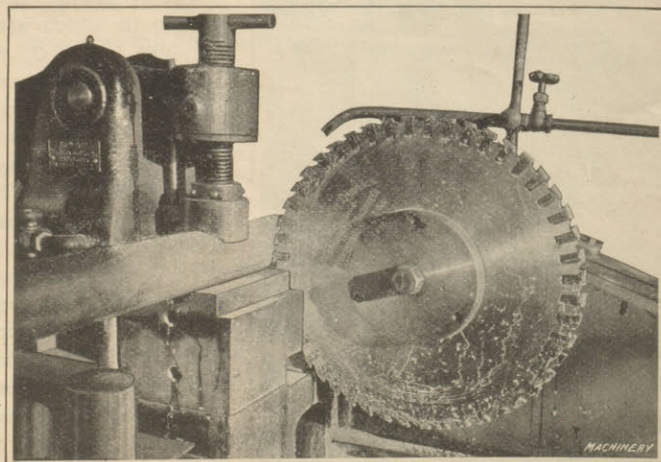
Cutting off Billets for making Shrapnel Forgings in a Newton Cutting-off Machine
